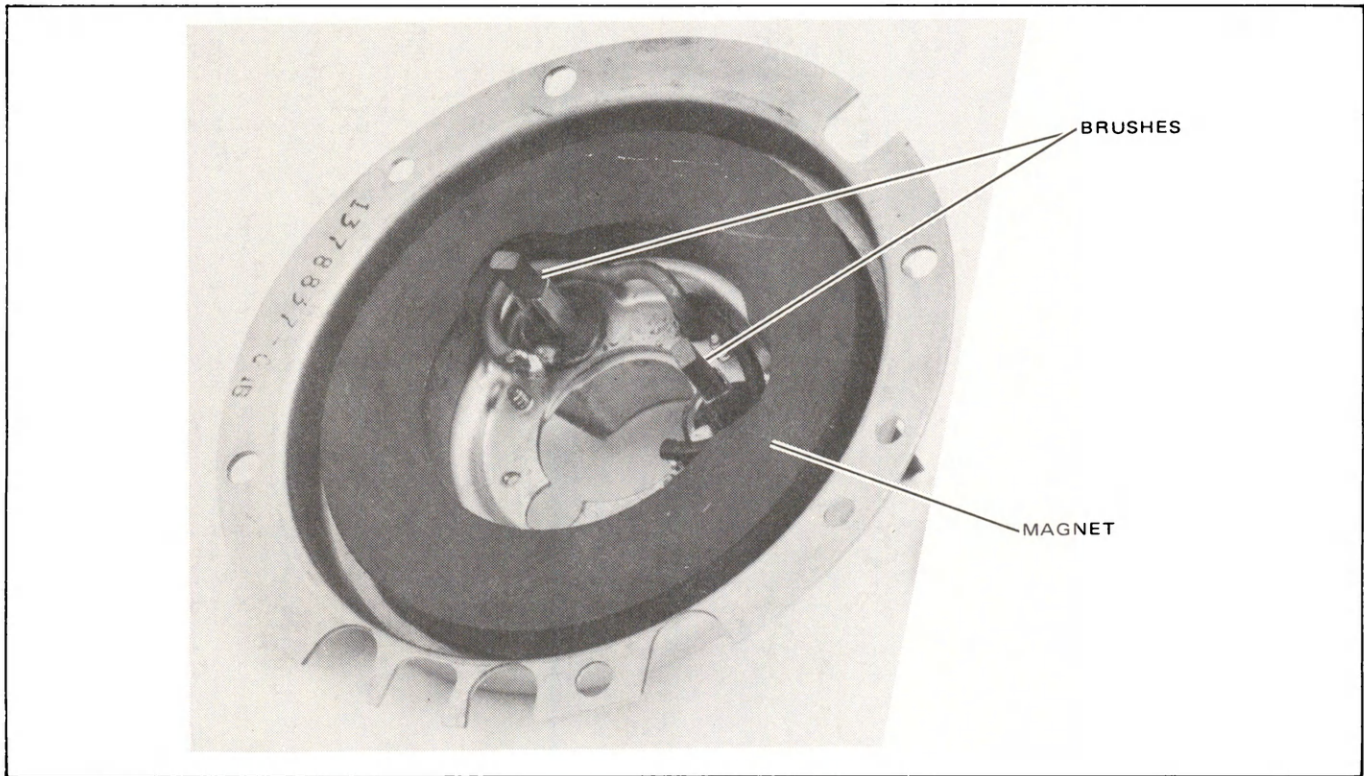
Scanner Motor Brush Plate Assembly, Rear View
